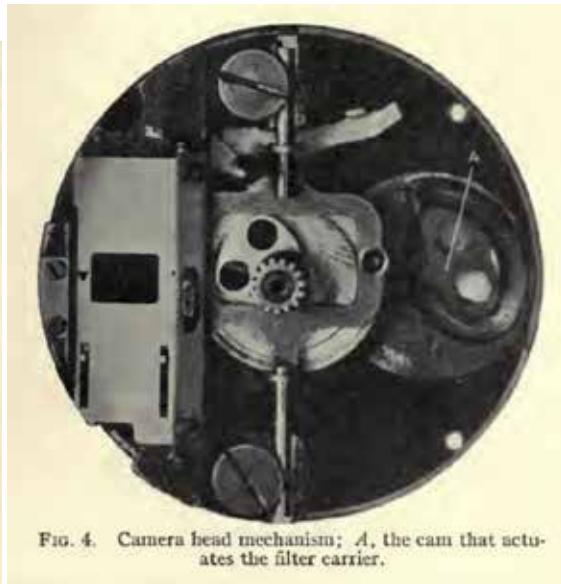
Camera head mechanism; A, the cam that actuates the filter carrier.
